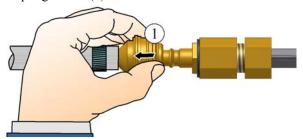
Disconnect the coupling socket from the quick coupling (similar to picture)
